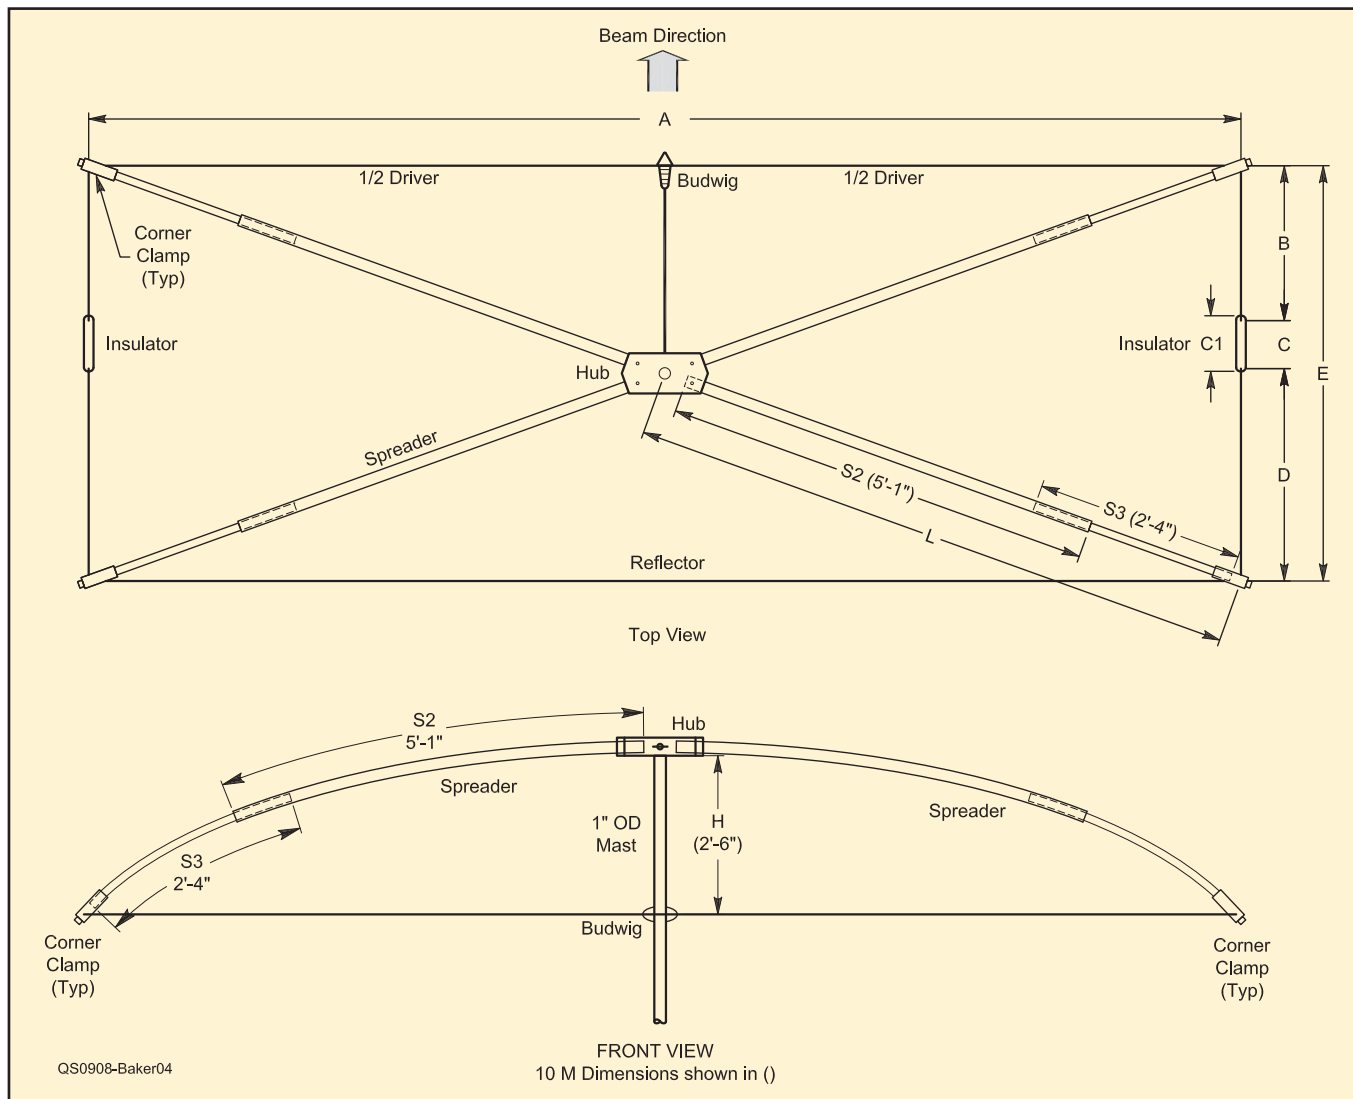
Dimensioned drawing of the 10 meter MoxBeam.
